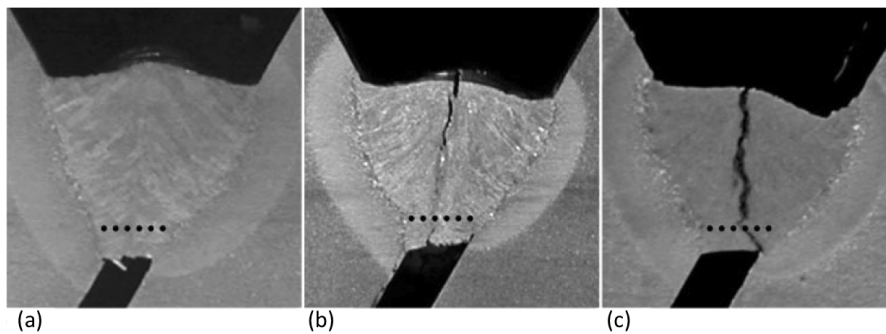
Sections of welds following crack testing; (a)→(c) is increasing M_S [101].
